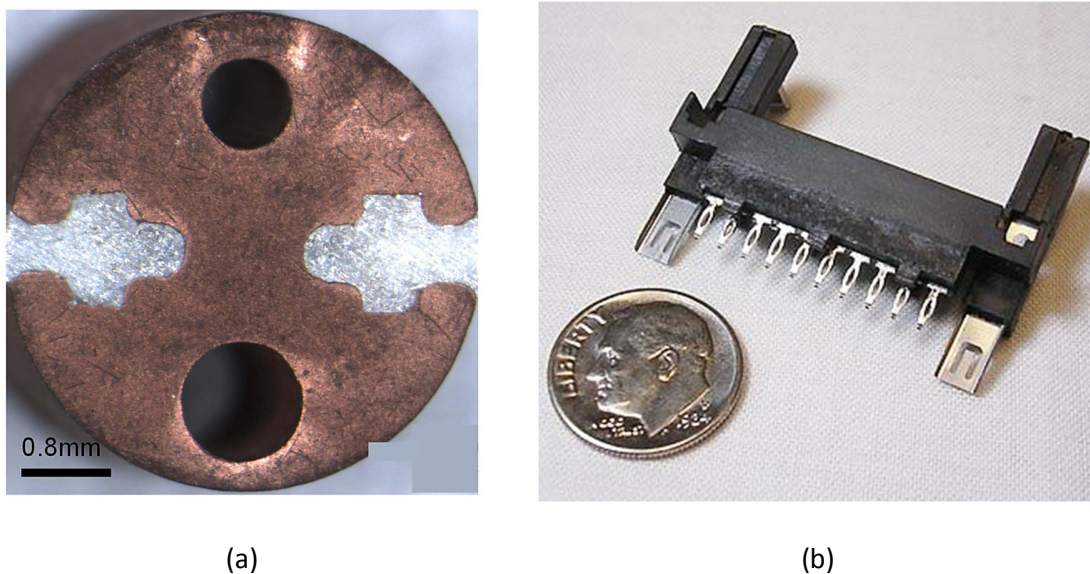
(a) 2k injection molding sample [14] (b) Insert molding sample [16].
